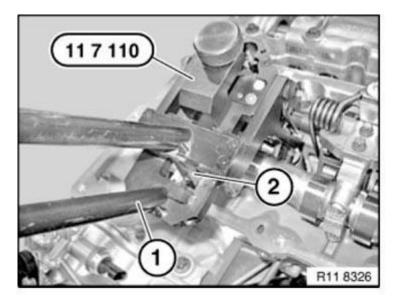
Identifying Latching Hook, Lever With Special Tool 11 7 110 Courtesy of BMW OF NORTH AMERICA, INC.
